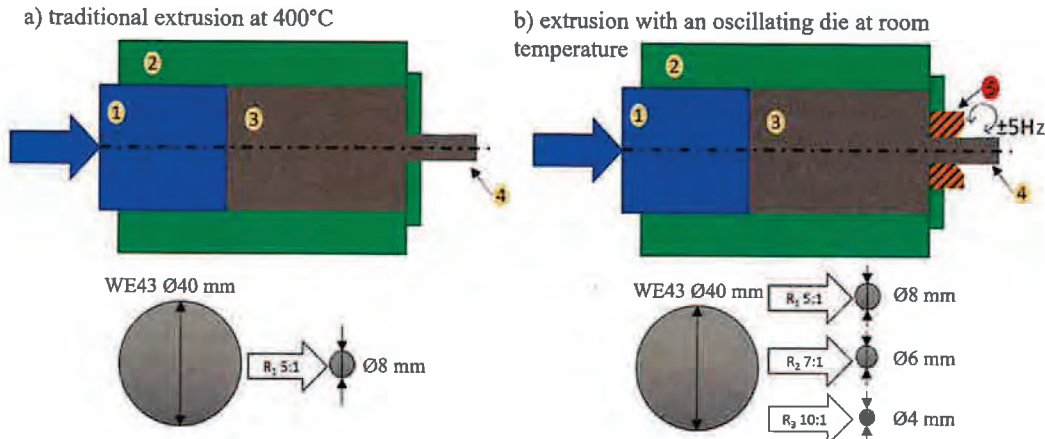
Schematic of a) traditional extrusion and b) extrusion with an oscillating die (KoBo): 1 – extrusion punch, 2 – injection cylinder, 3 – initial billet, 4 – final rod, 5 – oscillating die.
